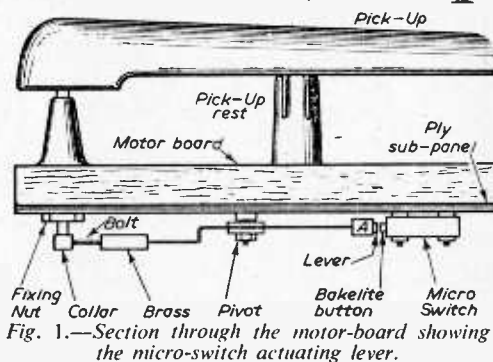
Section through the motor-board showing the micro-switch actuating lever.
